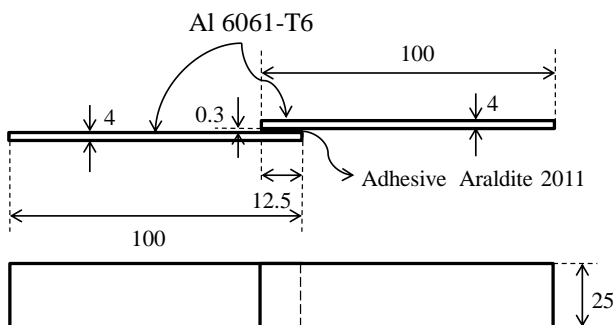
Geometrical specifications of single lap joints (dimensions in mm)
